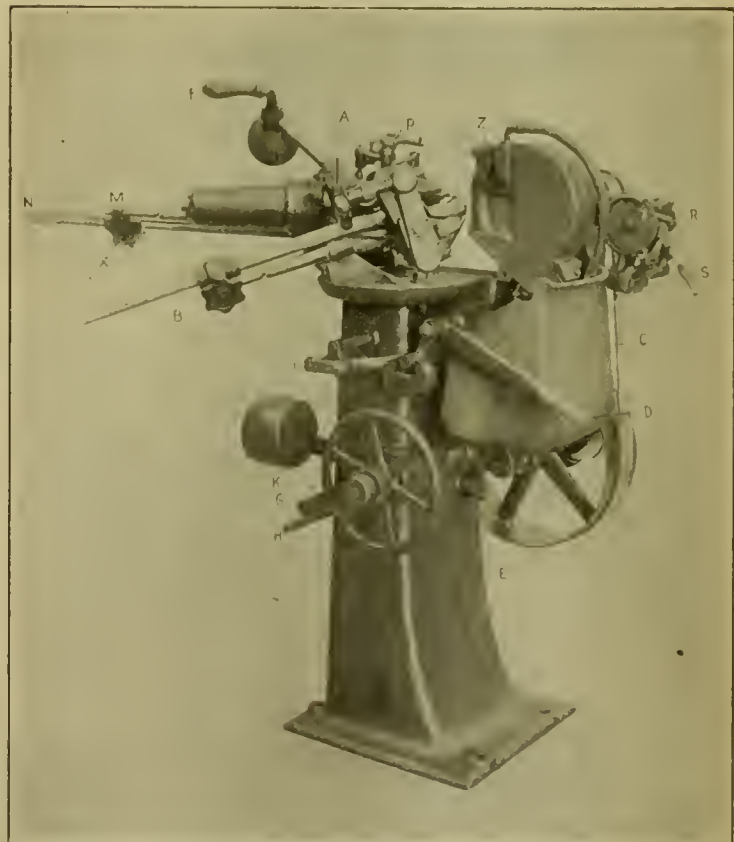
PATENT IMPROVED DRILL-GRINDING MACHINE—WILLIAM SELLERS & COMPANY.
